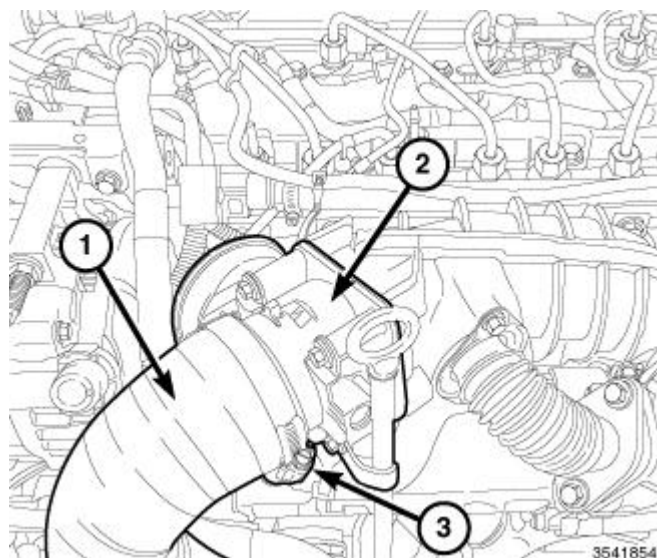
Charge Inlet Tube, EGR Air Control Valve & Clamp
